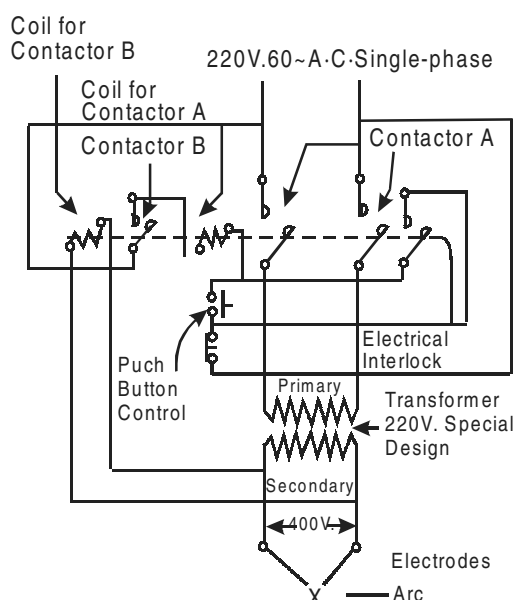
Circuit diagram of apparatus used with atomic hydrogen welding torch.
